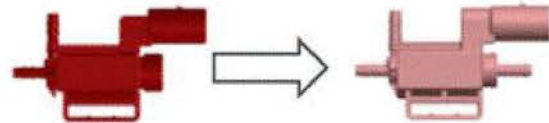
New valve with part number 06H 906 283 B (right) has an additional connection for the fresh air line.
